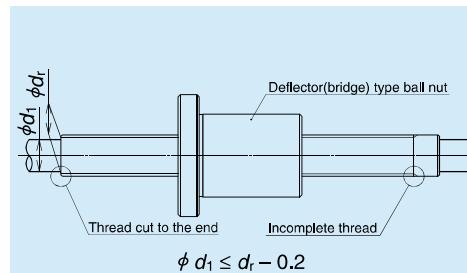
Shaft end of a deflector (bridge) recirculation system ball screw
